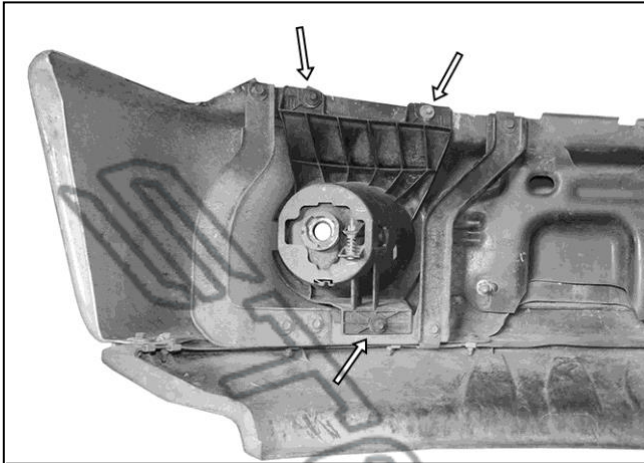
Attach Outer Support Bracket to flange on frame and center hole in Bumper Bracket
